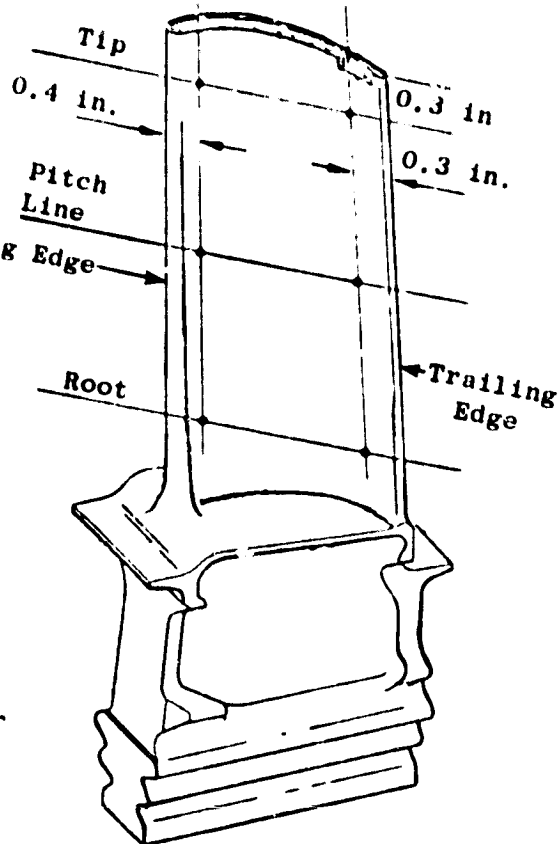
HP Turbine Rotor Stage 2 Blade.
